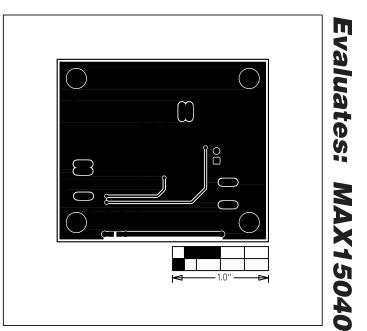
MAX15040 EV Kit PCB Layout—Solder Side
